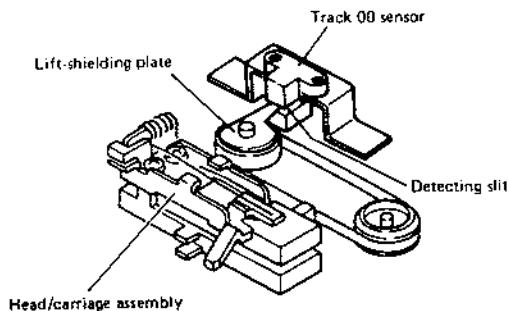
Track 00 Sensor and Head/Carriage Assembly
